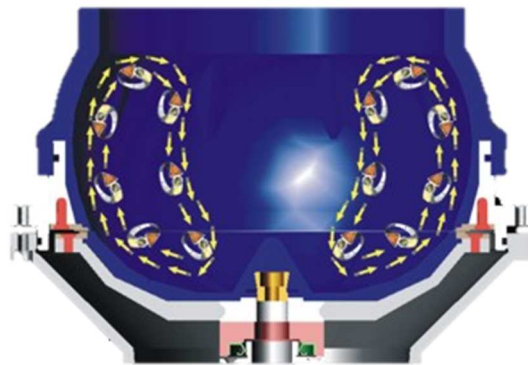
Movement of the pieces inside the disc finishing machine. *Source: www.makromakine.com.tr
